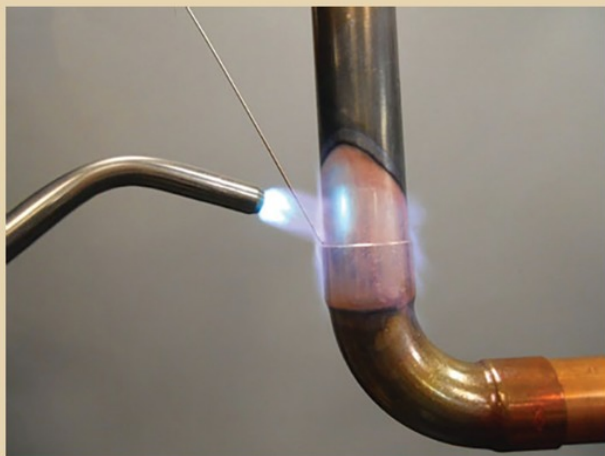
An air/acetylene torch melting a brazing alloy into an elbow joint.
